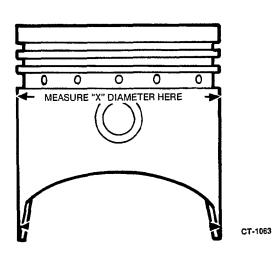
PISTON CLEARANCE MEASUREMENT
